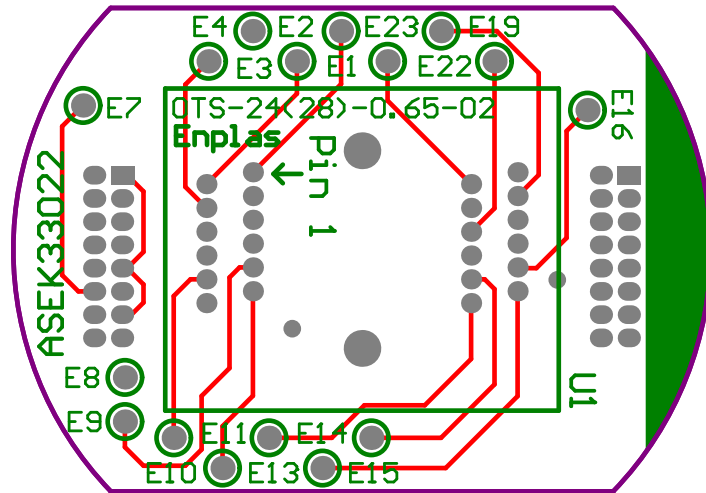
A33022 Socketed Dual Die Granddaughter Board
